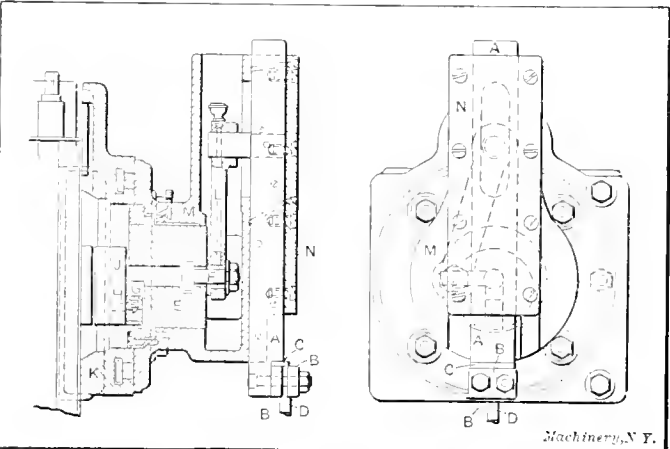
Section and Face View of Slotting Attachment, showing Construction
